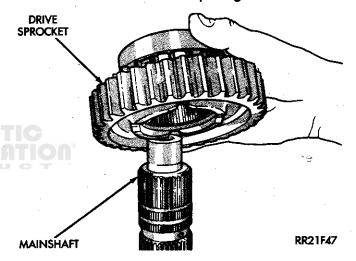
Removing/Installing Mainshaft Drive Sprocket
